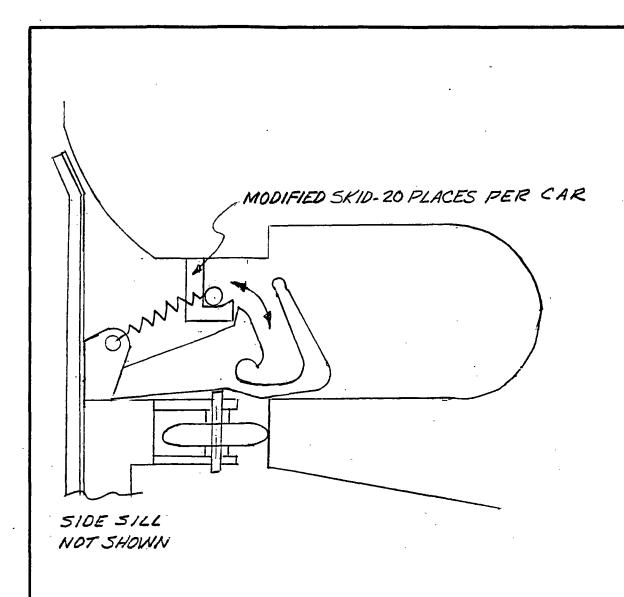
TYPICAL SECTION SECTION A-A
